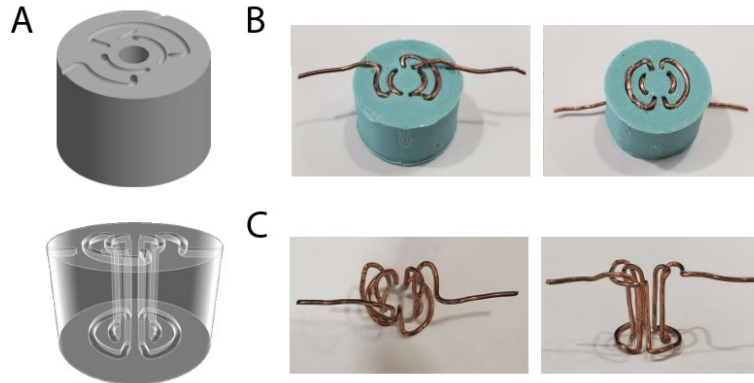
Proposed double-saddle coil DIAPER template. A) CAD drawing with internal coil path depicted. B) 22-gauge copper wire threaded into an ABS template (left – top, right – bottom). C) Recovered coil.
